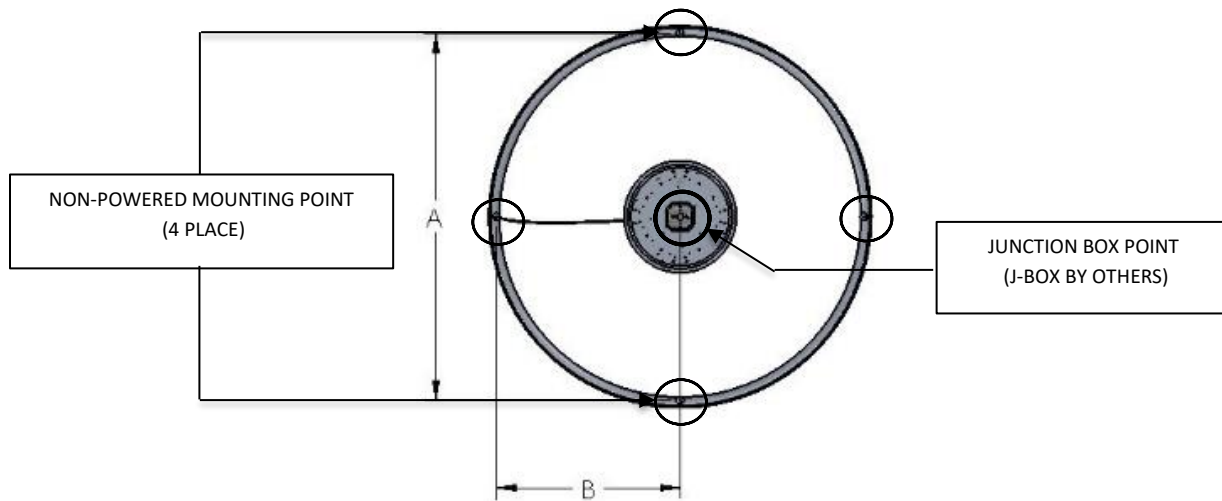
TOP VIEW SHOWING MOUNTING VIEW INFORMATION
